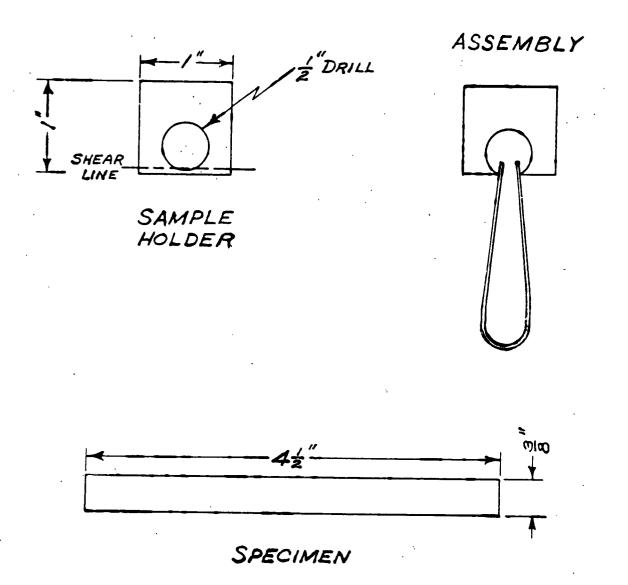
THE U-BEND STRESS CORROSION SPECIMEN AND HOLDER
